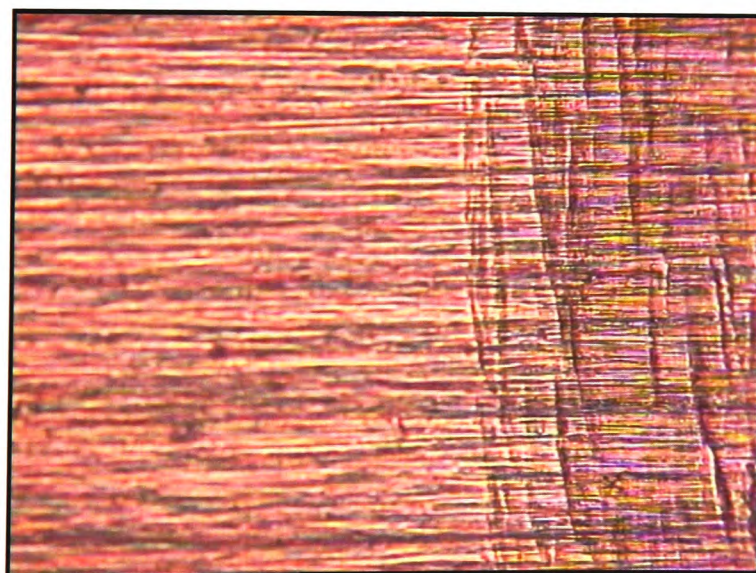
Surface finish on a specimen subjected to a single impact with a 25mm radius impactor hammer head - edge of impact crater shown
